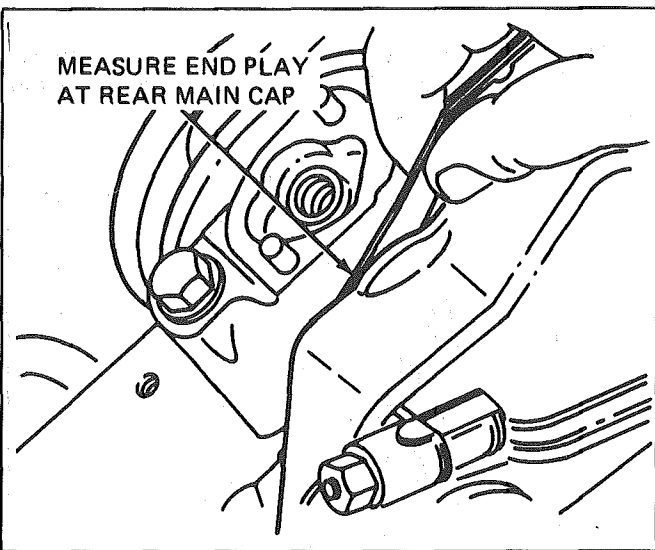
A3-41 Measuring Crankshaft End Play - Typical
